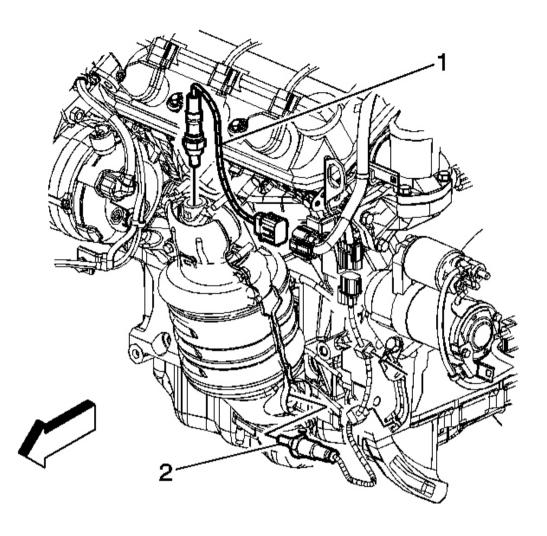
View Of Bank 2 Heated Oxygen Sensor 1 Using The J39194-C Courtesy of GENERAL MOTORS CORP.
